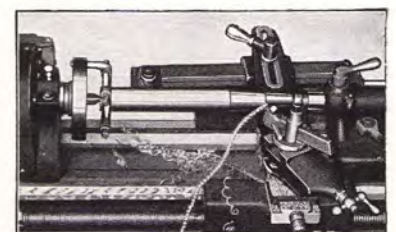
Turning a Taper on a Shaft Using the Graduated Taper Attachment.
